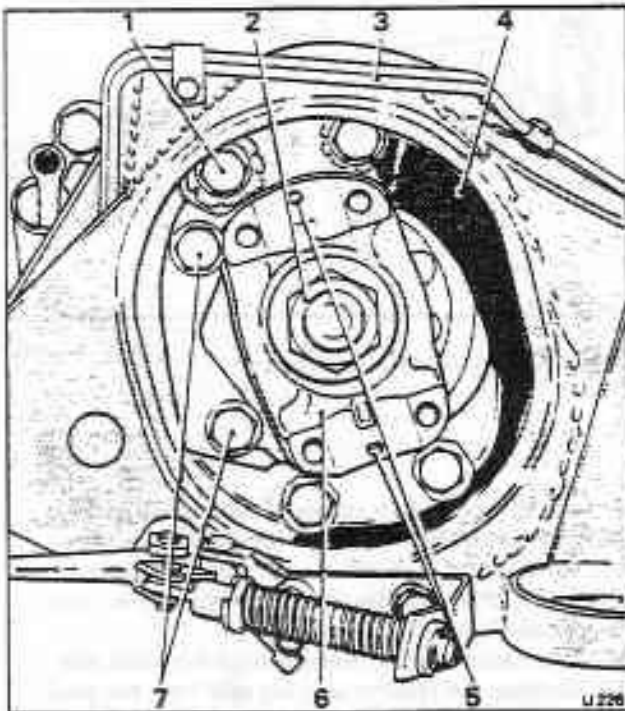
Rear hub and brake caliper mounting (cars fitted with ball and trunnion joints)
